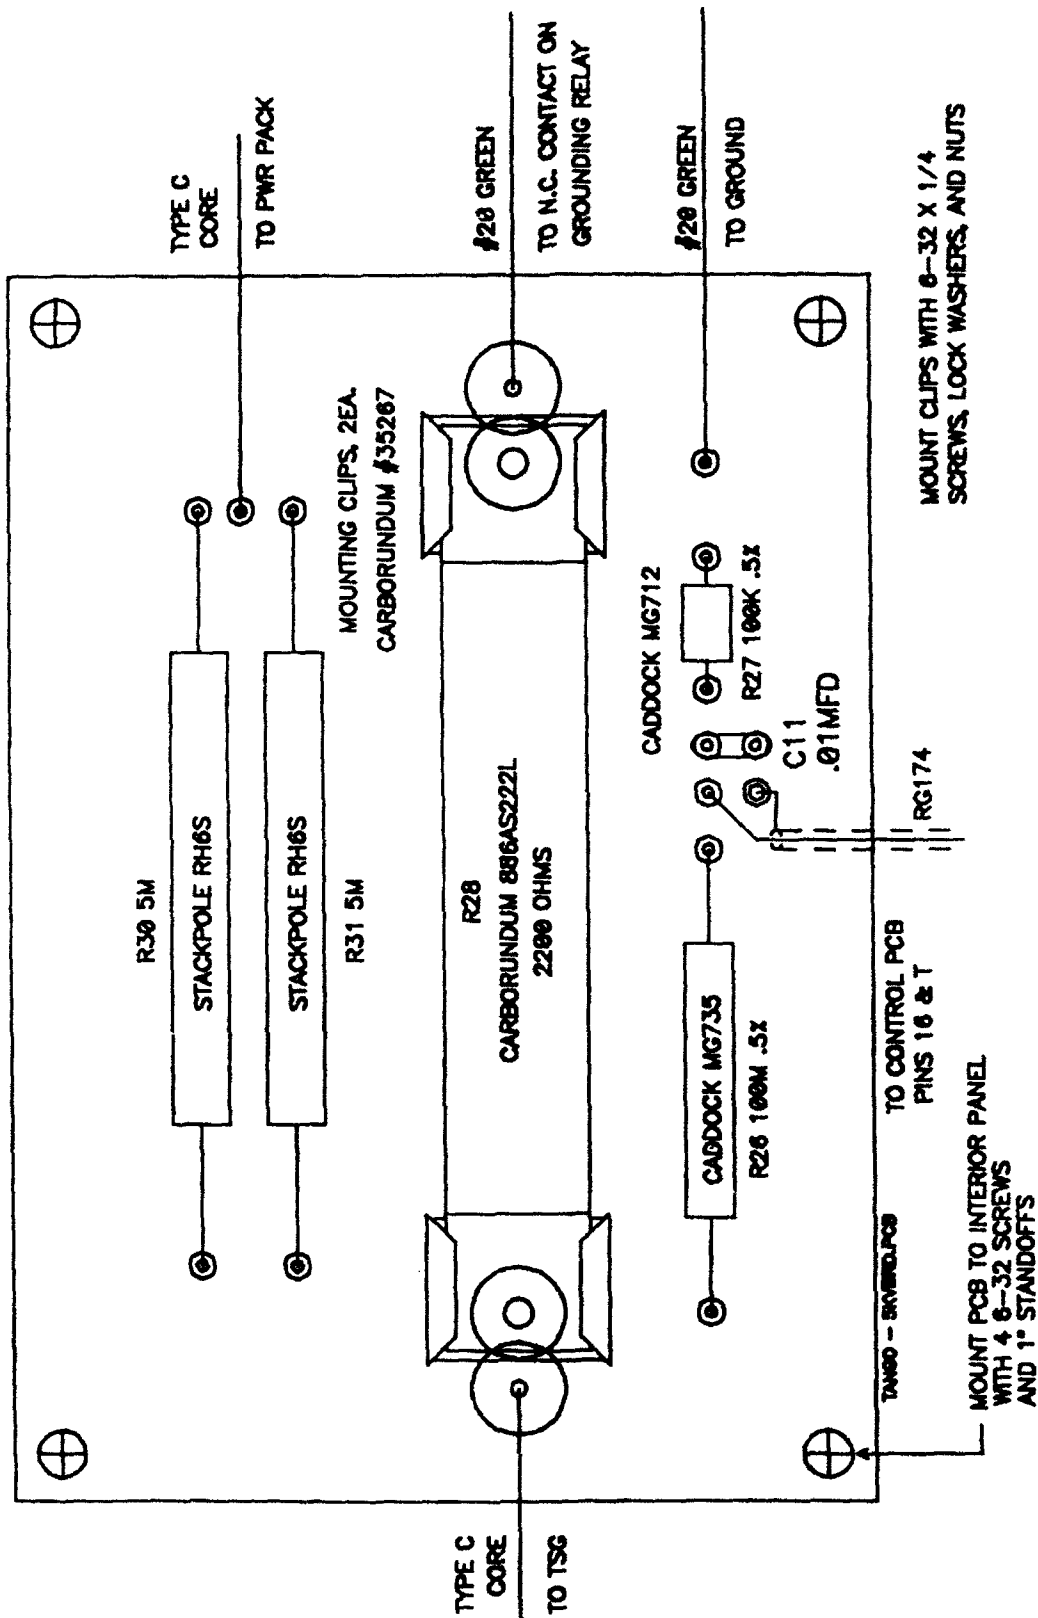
5-kV RESISTOR BOARD COMPONENT LAYOUT
